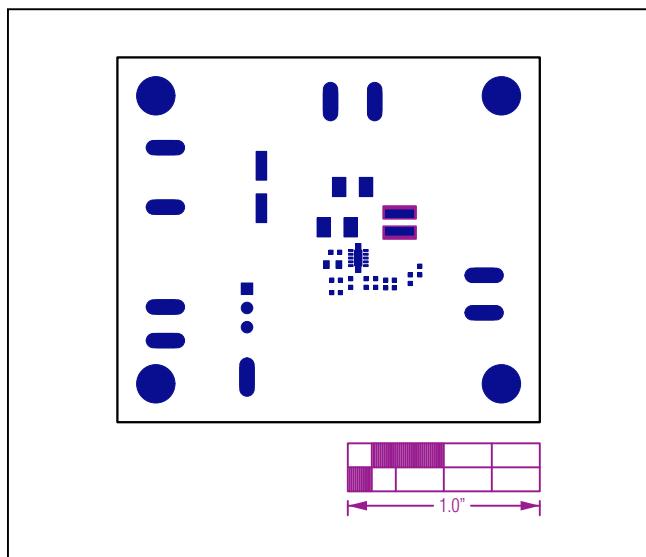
MAX17542G 3.3V Output EV Kit Component Placement Guide—Top Solder Mask
